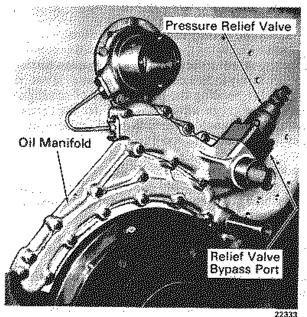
Main Lube Oil And Piston Cooling Oil Manifold
